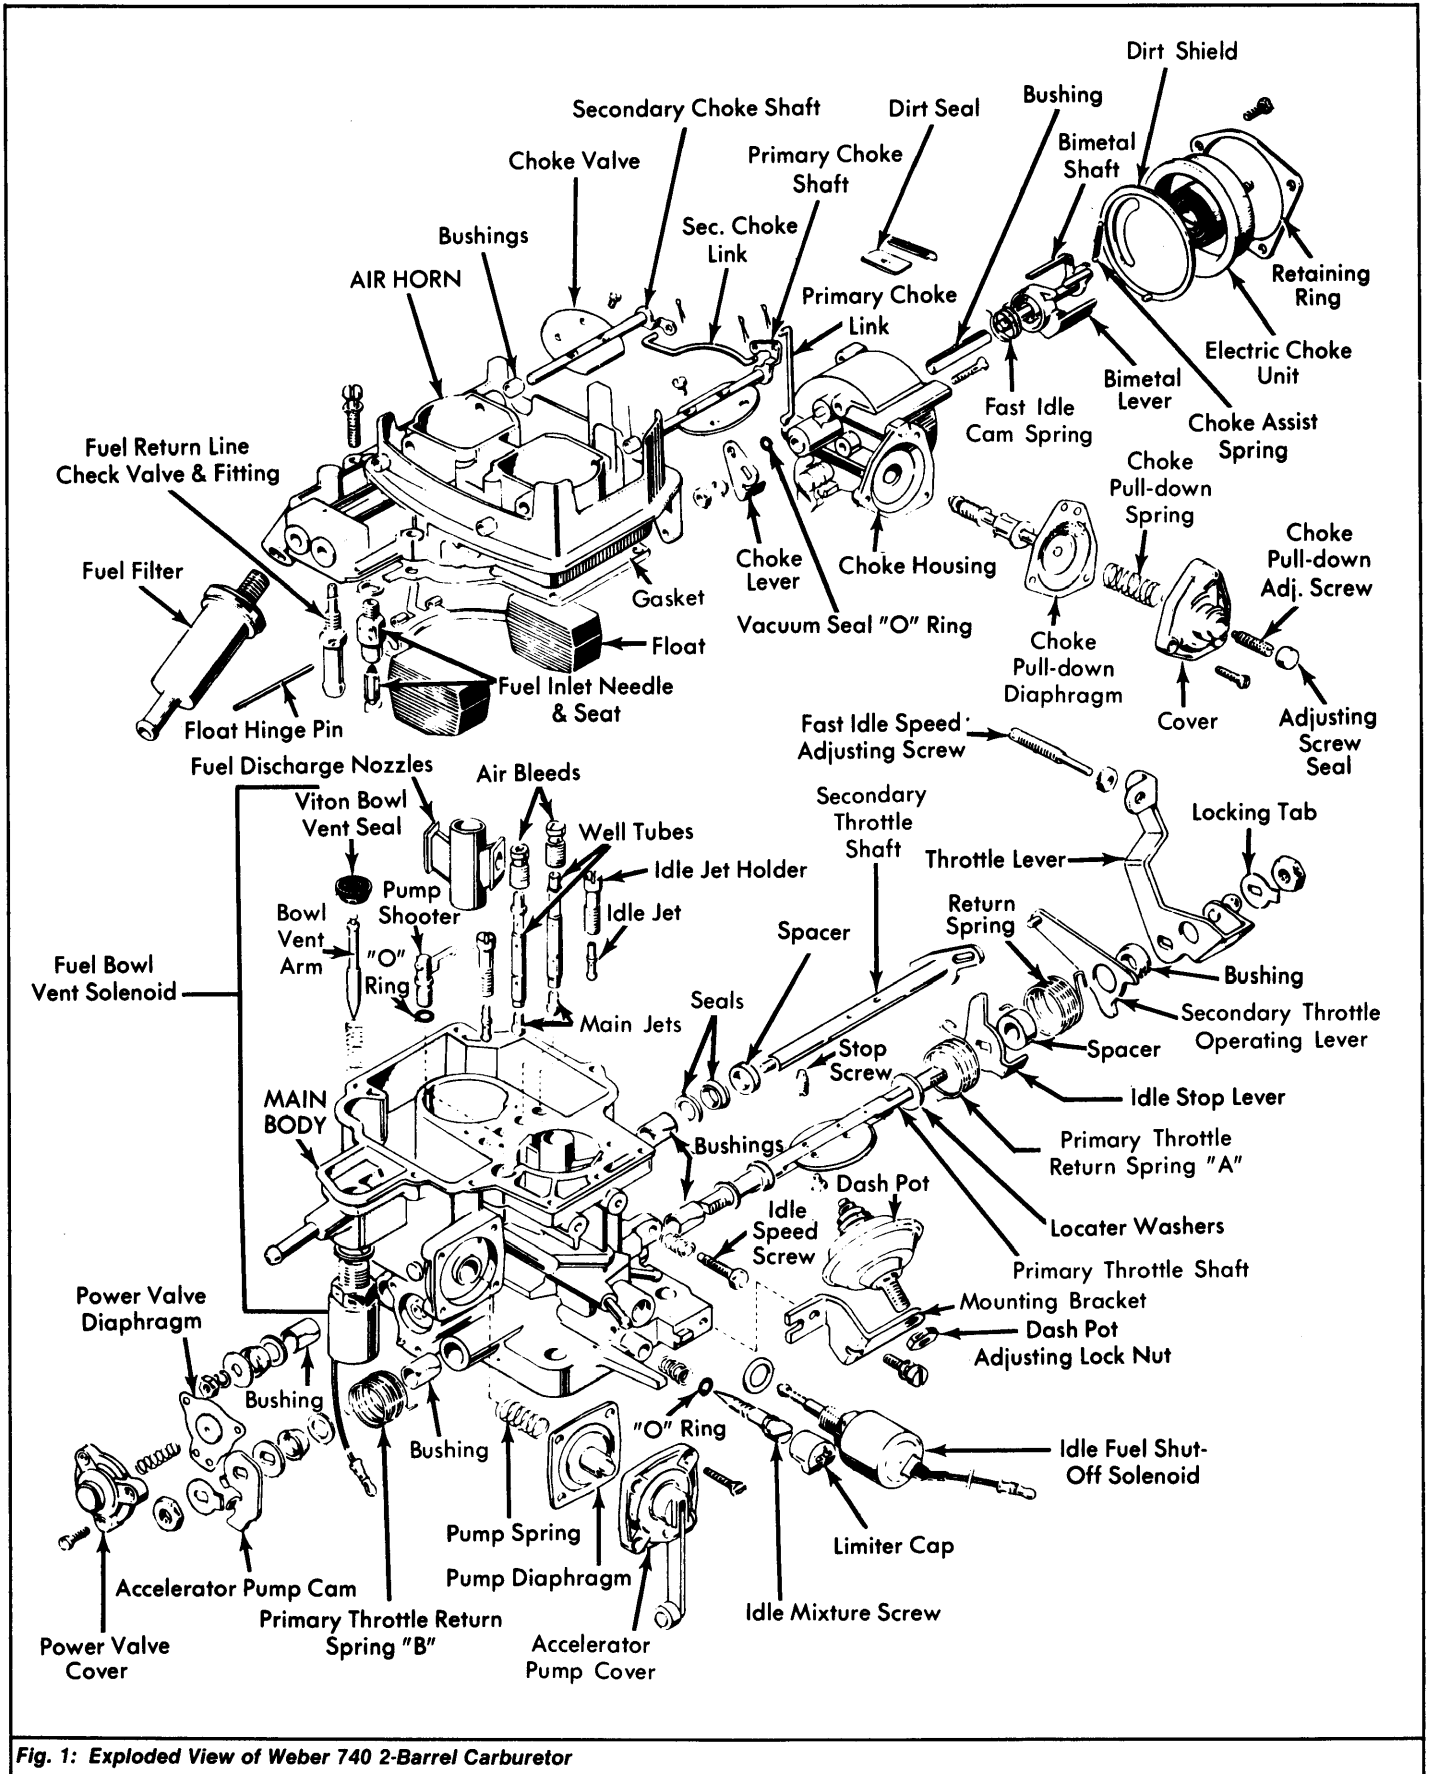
Exploded View of Weber 740 2-Barrel Carburetor
